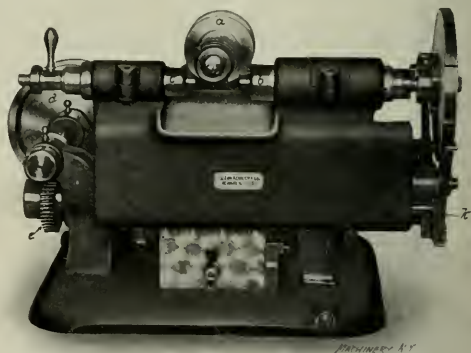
Front View of Automatic Clock and Watch Pinion Cutter.
